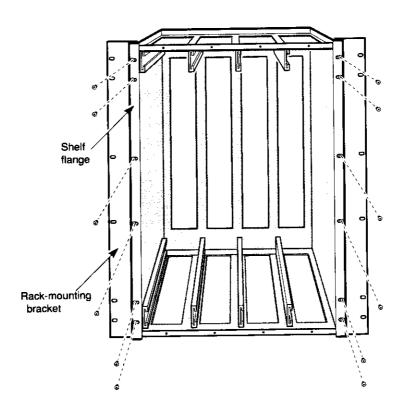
Attaching the 23-inch (58 cm) Rack-mounting Brackets
